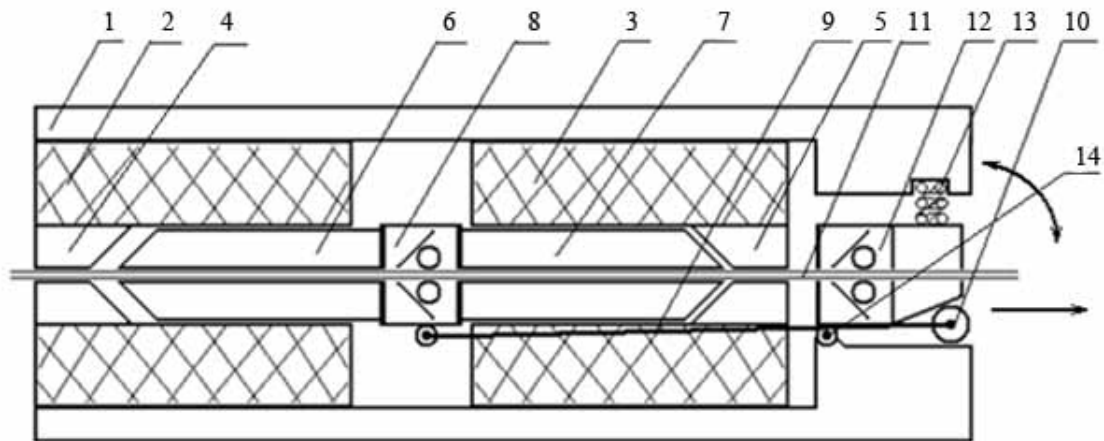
Design of pulse feeder: 1 - body, 2, 3 - electromagnetic coil; 4, 5 - core; 6 - armature; 7, 8, 12 - ball-bearing guide; 9 - rod; 10 - roller; 11 - welding wire; 13 - compression spring.
